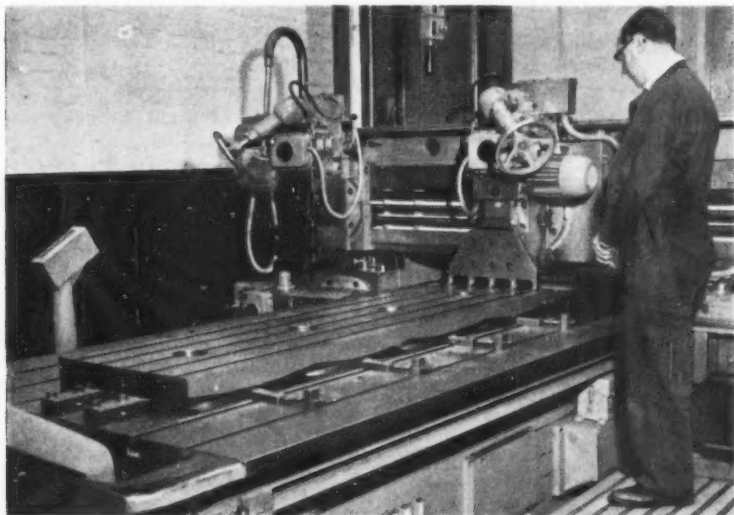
Close-up View of the Waldrich-Siegen Planer Set Up for Machining T-slots in Indexing Table Attachments
